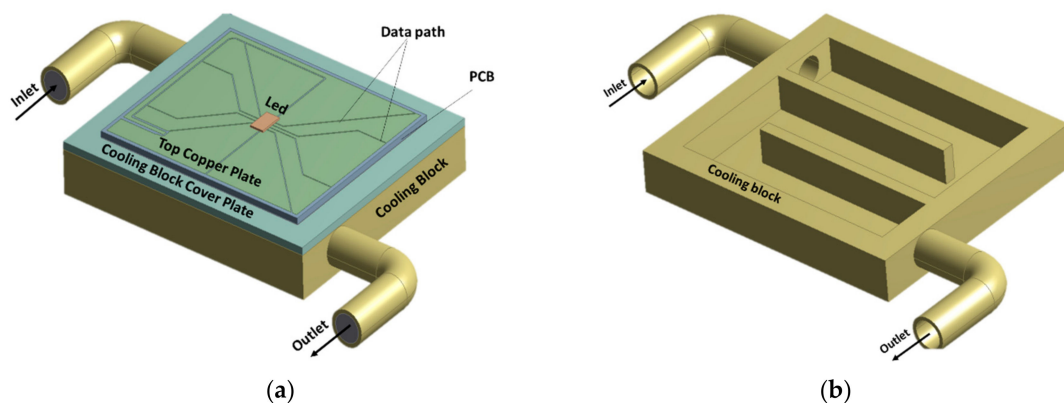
(a) Assembly of the LED PCB with liquid cooling block; (b) mini-channel structure of the cooling block.
